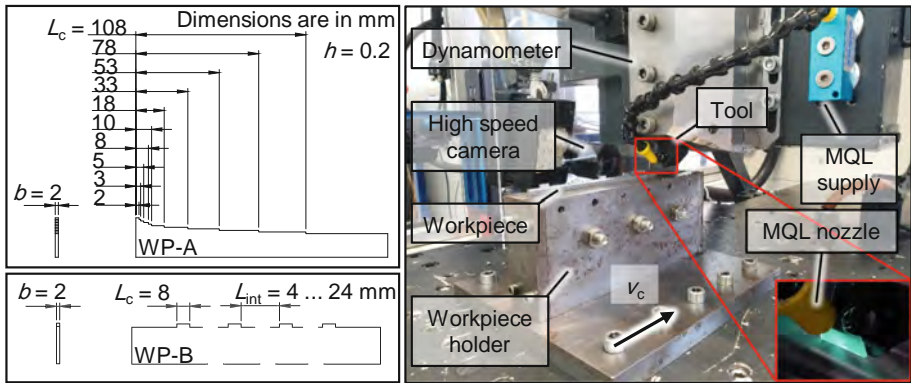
Workpieces geometry (left) and experimental Setup (right)
